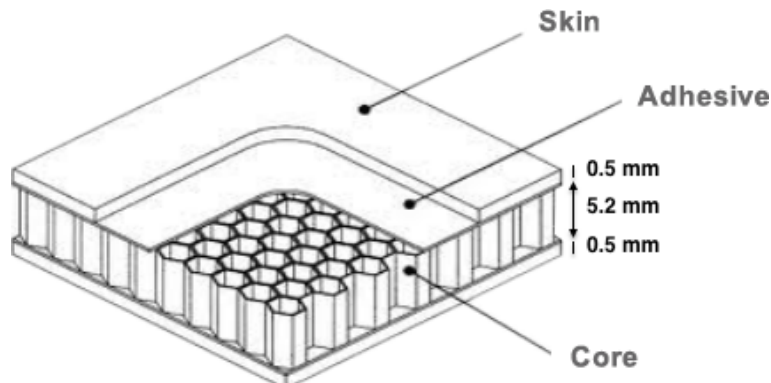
The honeycomb aluminium structure used for the containers skin.
